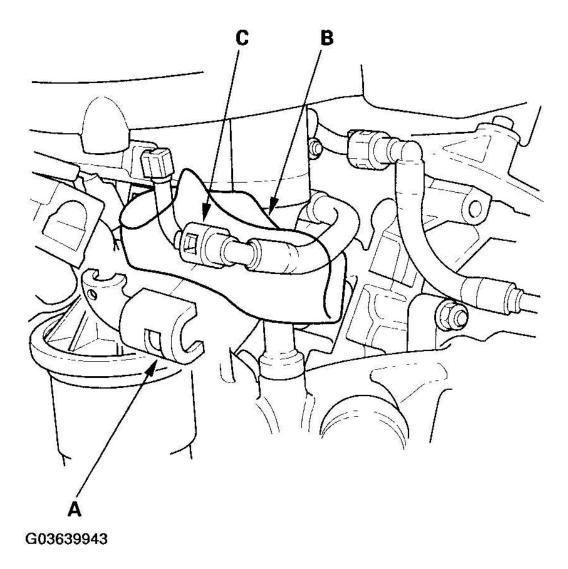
Removing Quick-Connect Fitting Cover (2003-04 Models) Courtesy of AMERICAN HONDA MOTOR CO., INC.
